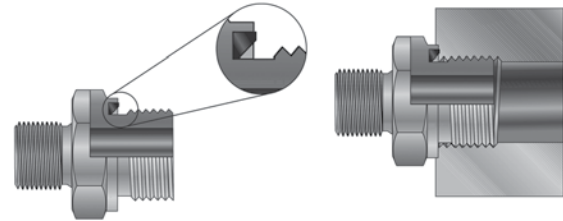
SAE / ISO / JIS B2351 Straight Thread Port O-Ring Upon Assembly
